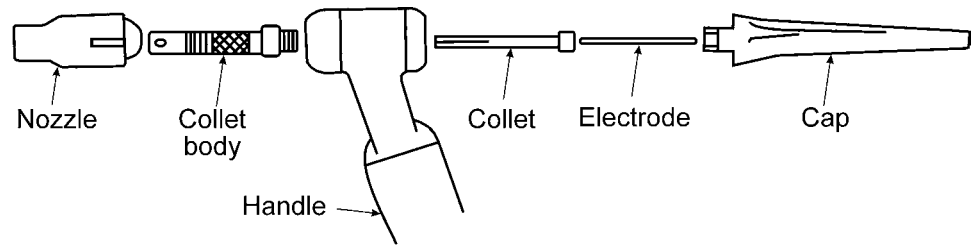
Schematic showing exploded view of key components comprising a typical gas tungsten arc manual welding torch
